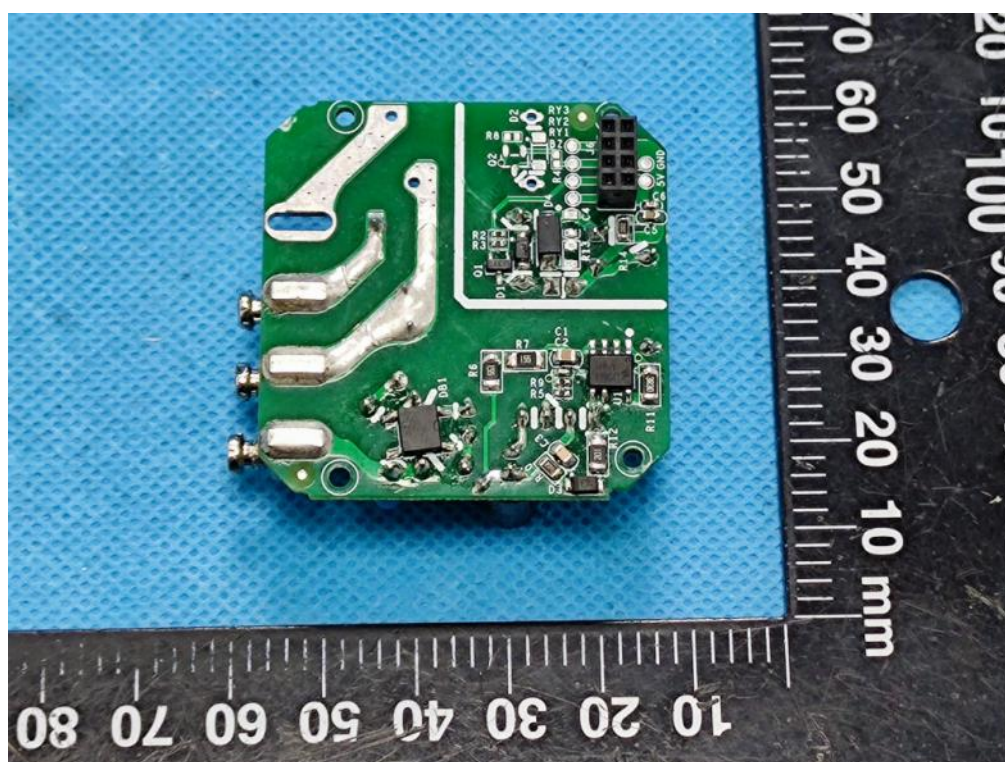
PCB bottom view of power board(Model: M5-2C-80)
